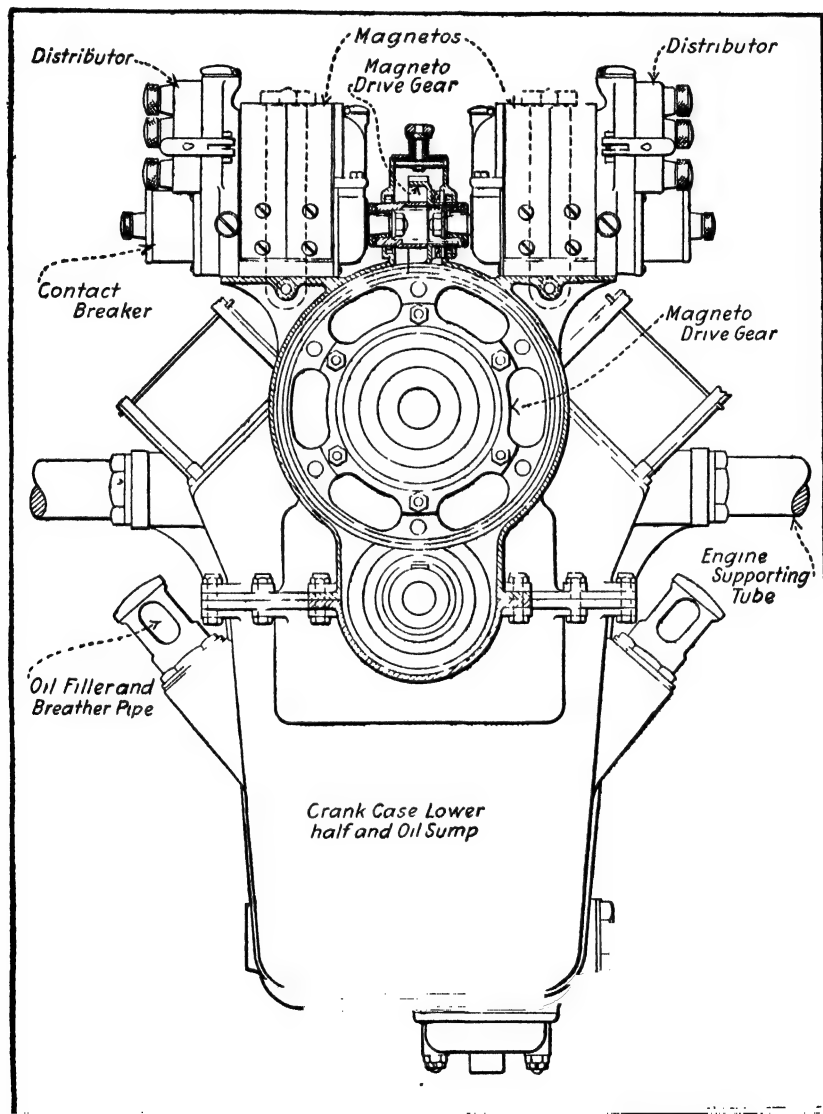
End View of Renault Twelve-Cylinder Engine Crankcase Showing Method of Magneto Drive and Magneto Mounting.
